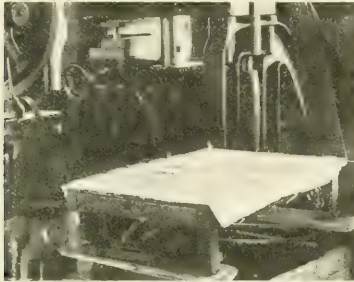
HEATING THE FLAT STRIPS ON THE ELECTRIC TABLE BEFORE EMBOSSEING THE DESIGN
